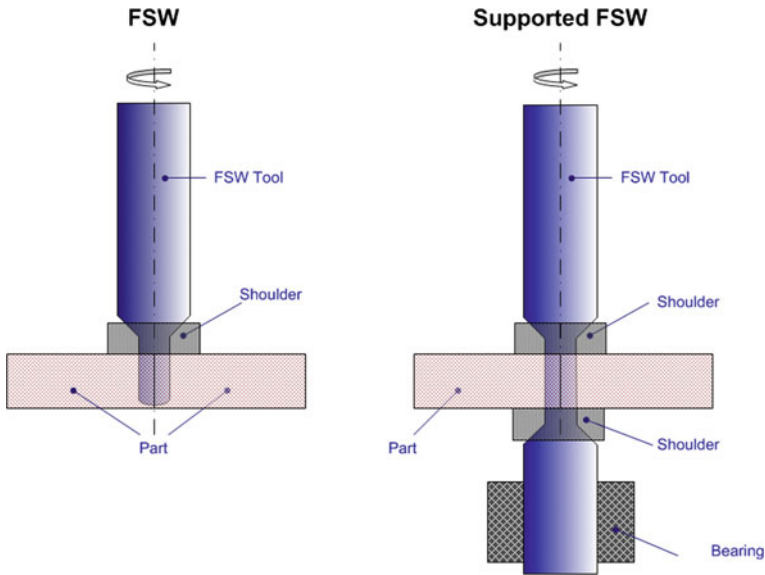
Schematic drawing of supported FSW. ‘Reproduced courtesy of TWI Ltd’
